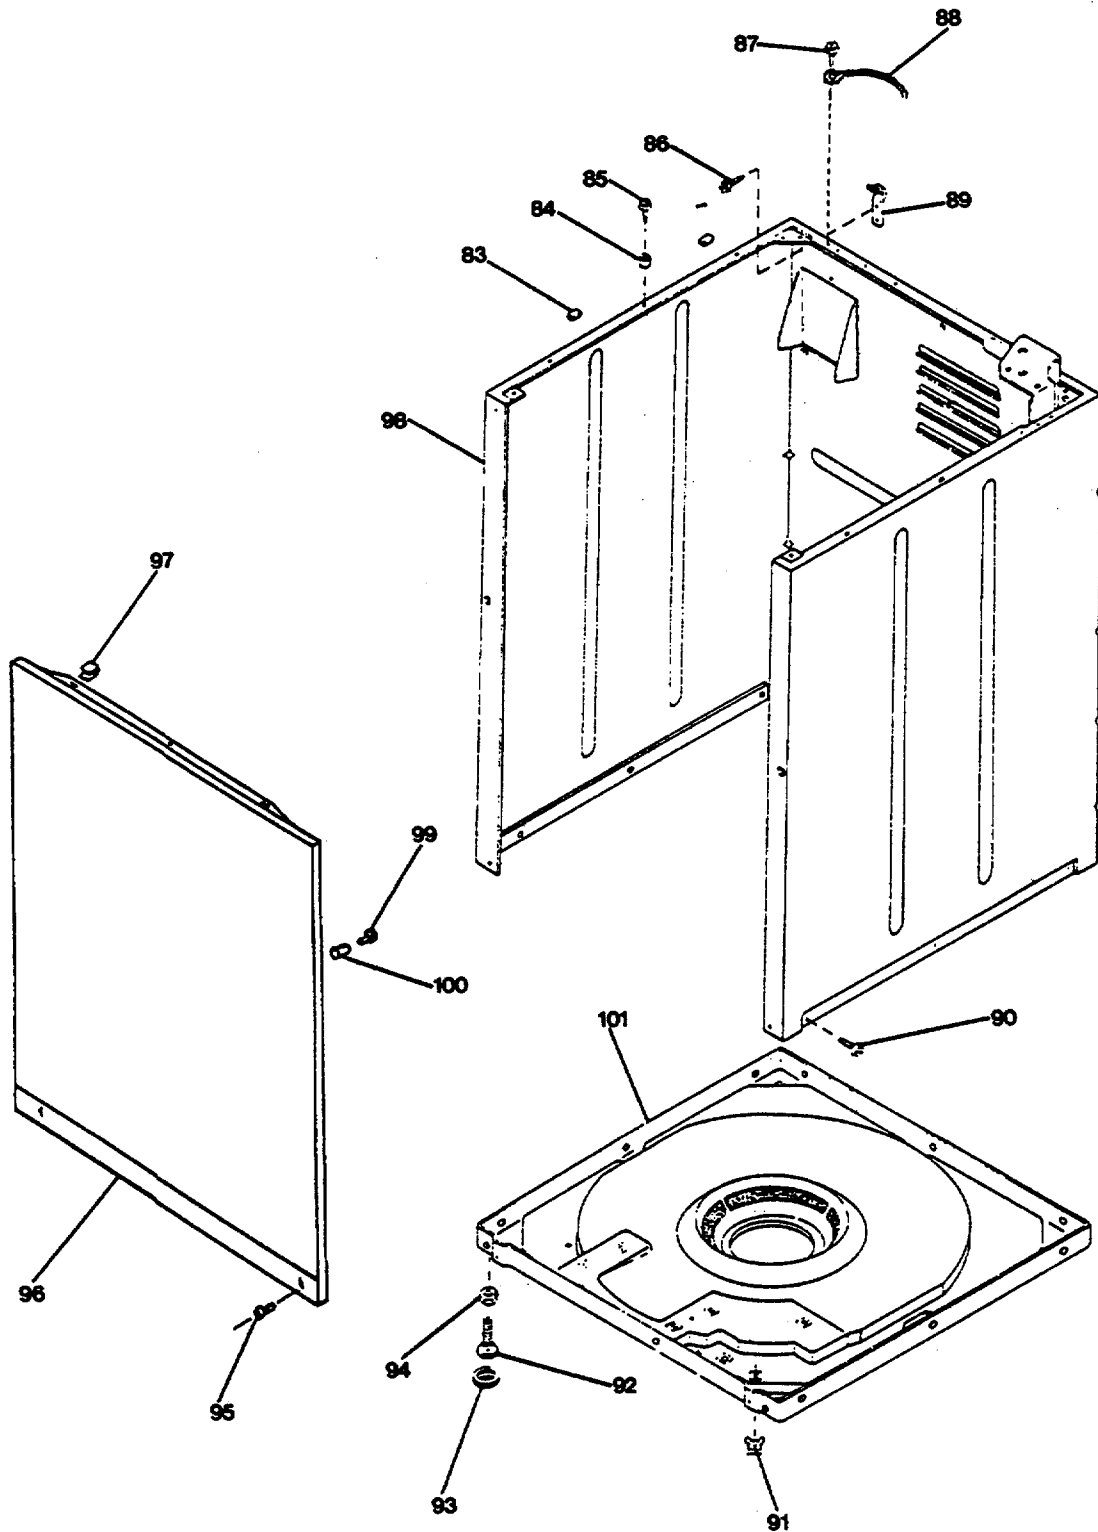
Washer Machine (Sheet 5 of 5).
